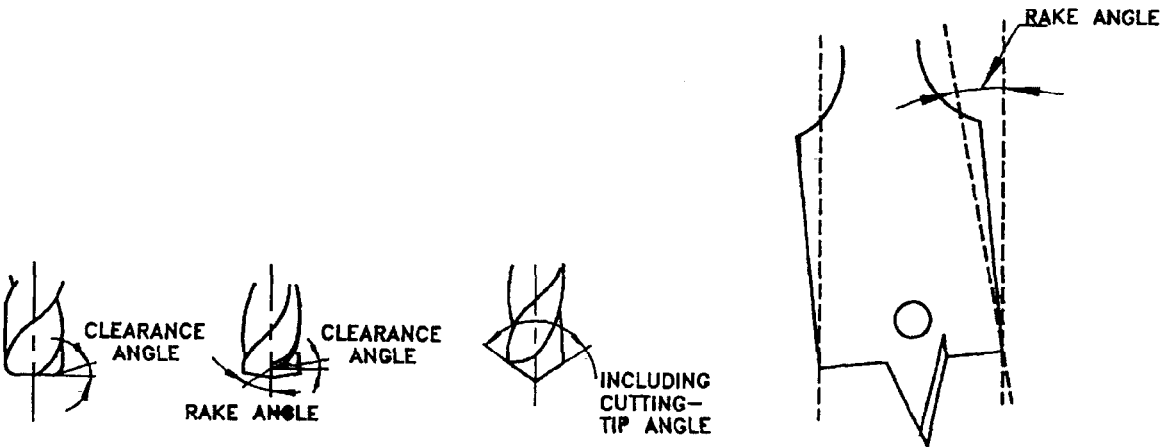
DETAILS OF SPECIAL DRILL BITS
